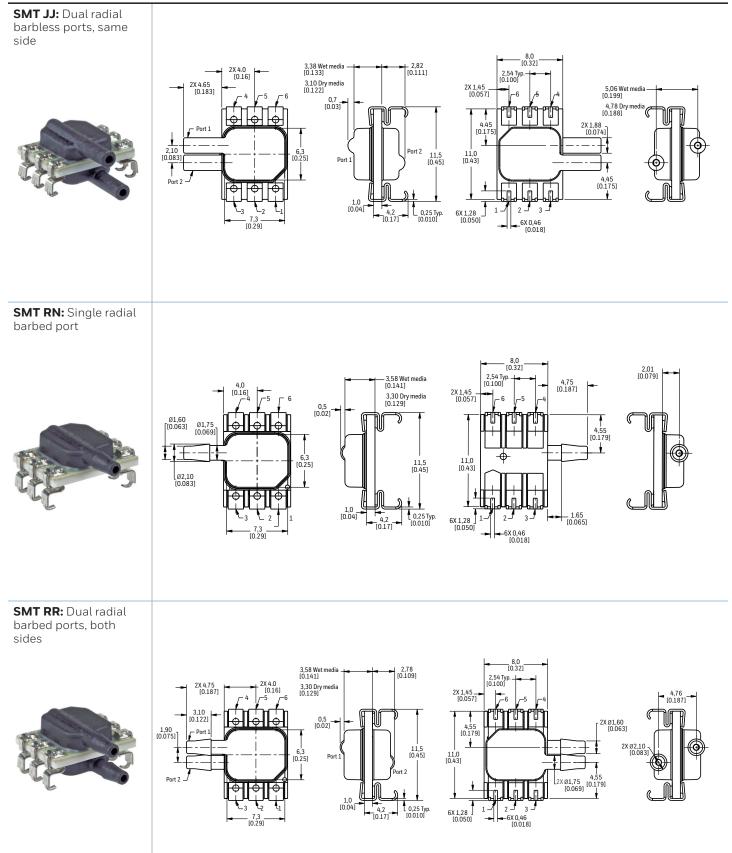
SMT Package Dimensional Drawings (For reference only: mm [in].)
